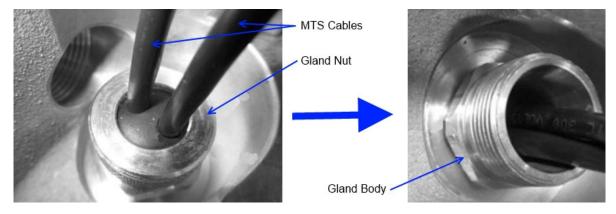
Remove PCB Cover Screws, Gland Body, and Gland Nut
